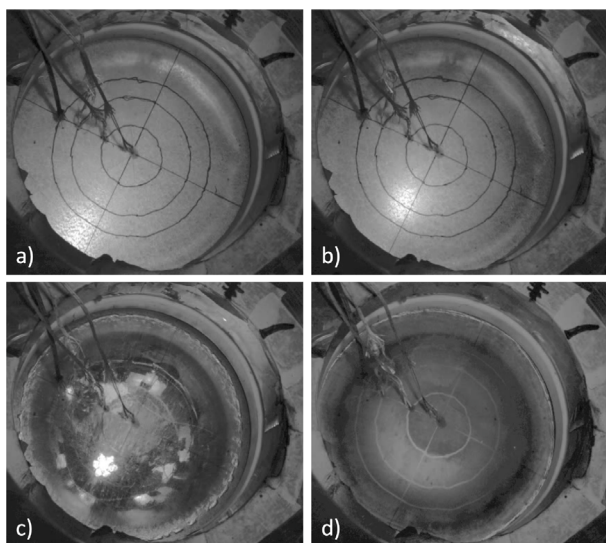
Evolution of the Usibor® 1500P blank with Al-Si coating during the heating step of a bulge test: (a) Initial conditions; (b) 400 °C; (c) 750 °C; (d) 900 °C.
